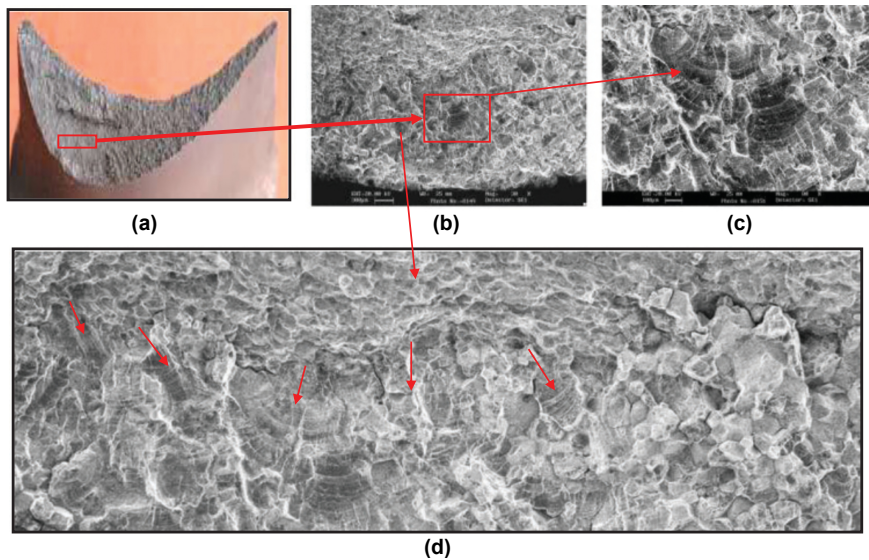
Sub-surface fracture due to fatigue failure of a turbine blade, showcasing (a) the fracture surface, (b) the fatigue crack origin, (c) a detailed view of fatigue striation and inside-to-outside crack propagation, and (d) the initiation of multiple cracks within the blade material, taken from [SSP16].
